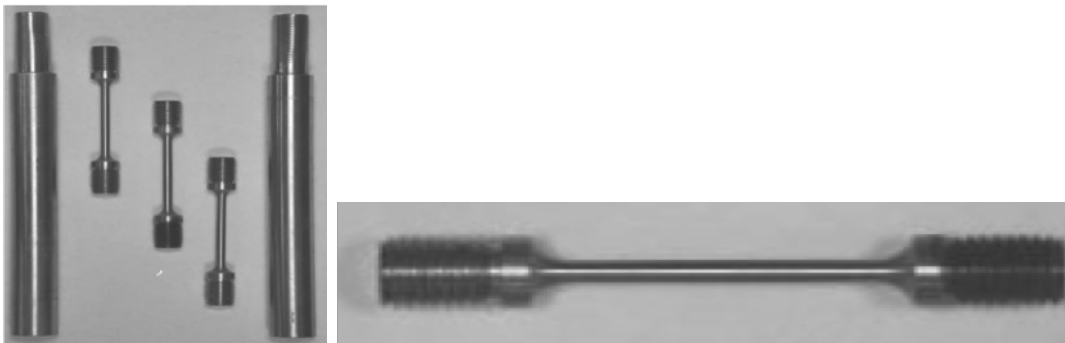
X-70 threaded dog-bone samples, 4mm cross section diameter, and gauge length of 45mm with grips for installation in the creep furnace.
